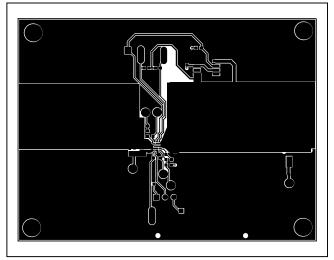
MAX15090 EV Kit PCB Layout—Component Side
